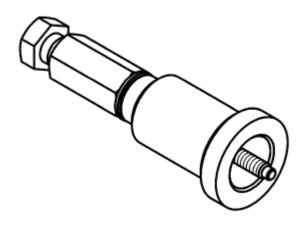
Crankshaft Damper/Sprocket Installer 8452 Courtesy of CHRYSLER LLC
